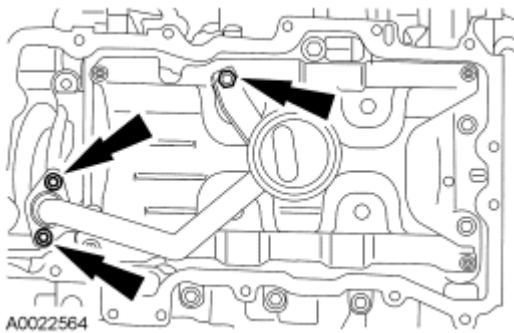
Locating Oil Pump Screen & Pickup Tube Bolts
